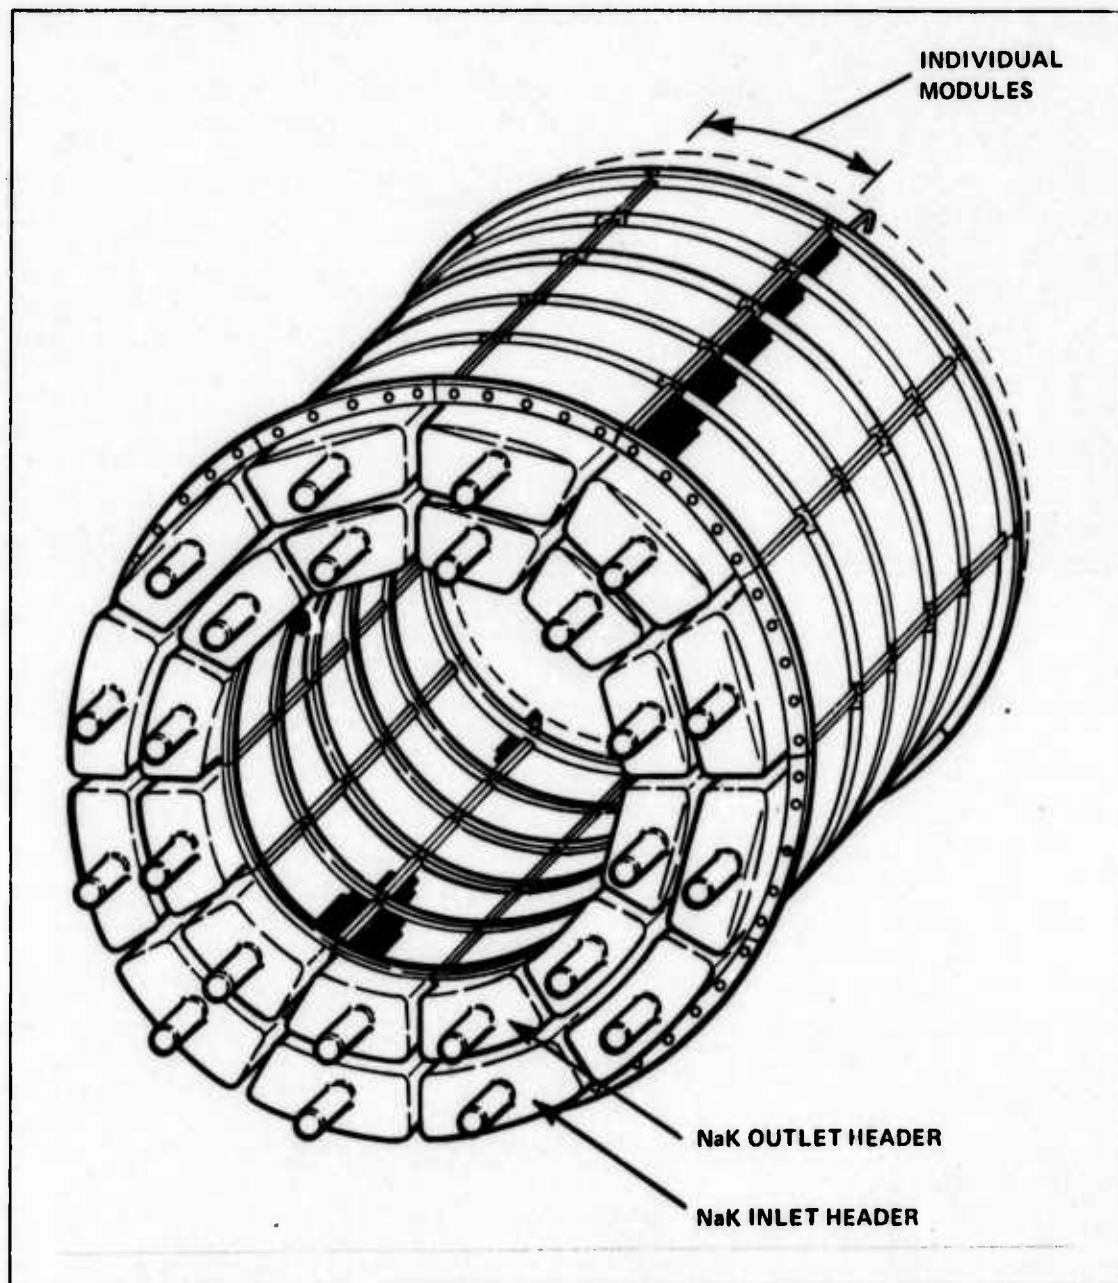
Wrap Around Heat Exchanger Assembly (Ref. 111, p. 69)
